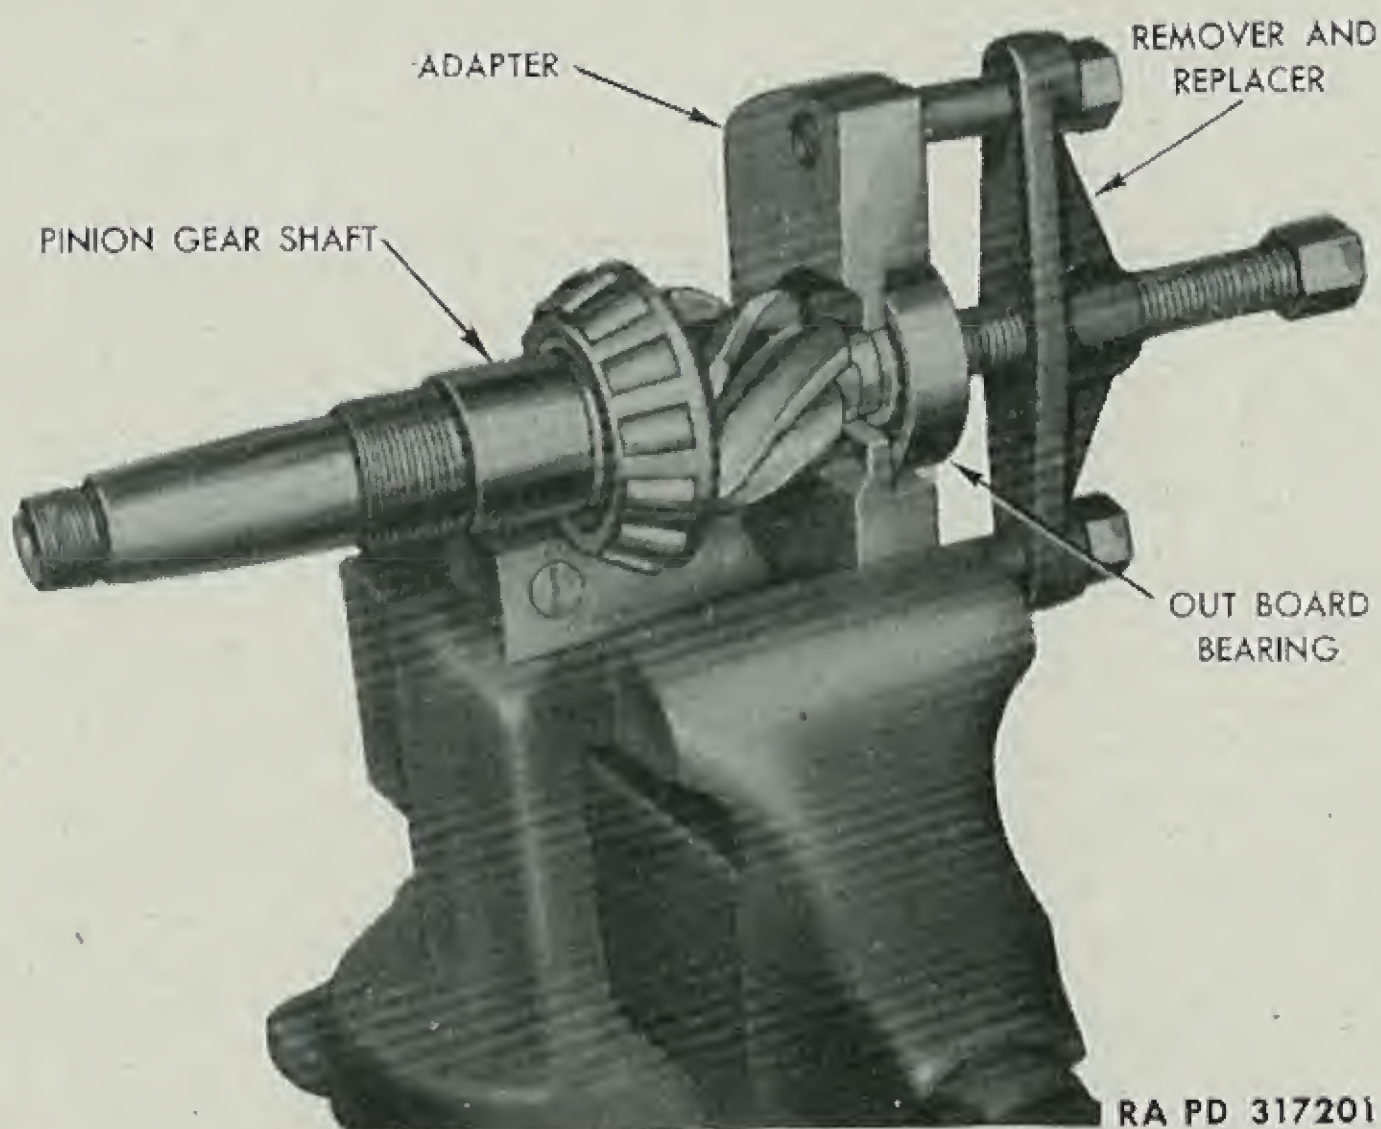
Removing Outboard Bearing from Pinion Gear Shaft with Remover and Replacer 41-R-2385-135 and Adapters M8-122A
